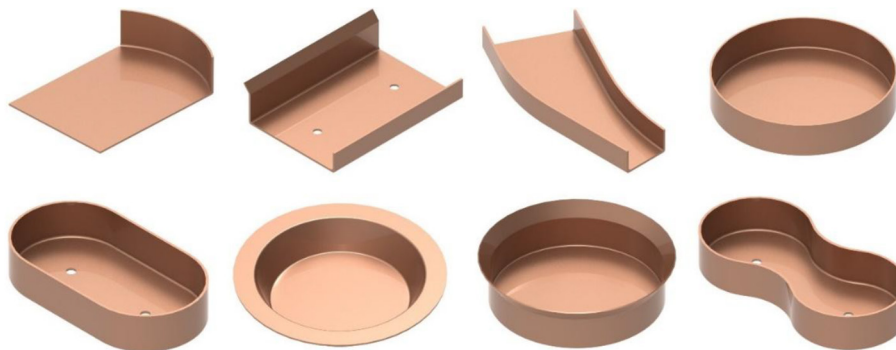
Examples of thin-walled products that can be obtained using the proposed incremental forming technology
